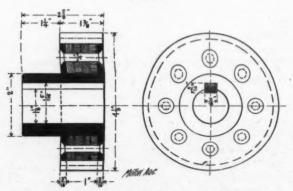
AUXILIARY DRIVING SHAFT GEAR.
